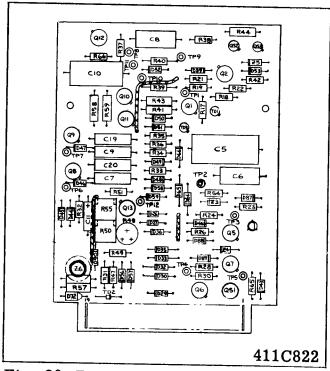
Printed Circuit Board Assembly for SDG-1 Relay
